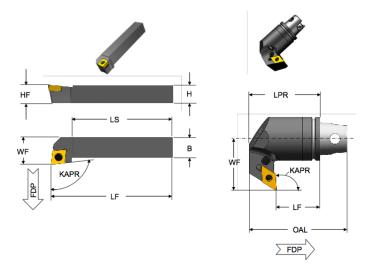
Cutting Tool Measurement Diagram 2 (Cutting Tool, Cutting Item, and Assembly Item – ISO 13399)
